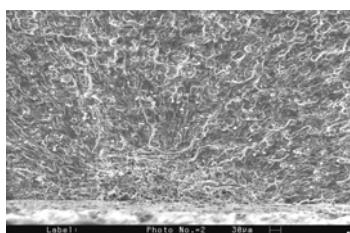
Fatigue crack starts from corrosion pit.
